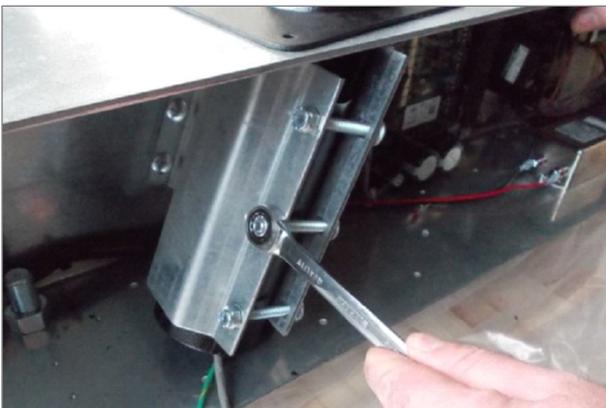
Pro/ProXL Assembly, Fixing the Railing 1
